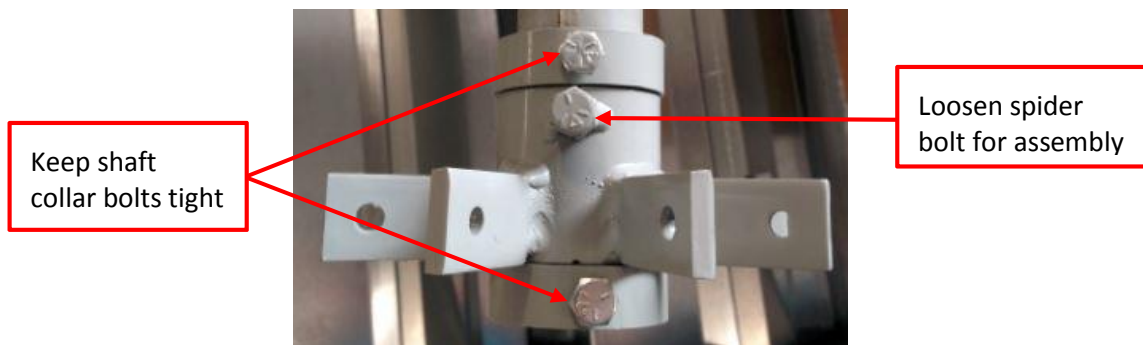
SHAFT COLLARS AND SPIDER ASSEMBLY
